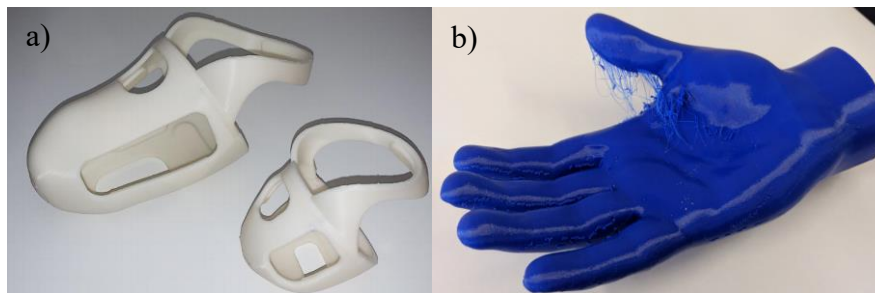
3D printed sockets, PLA material (a) and hand, TPU material (b), before post processing treatment
